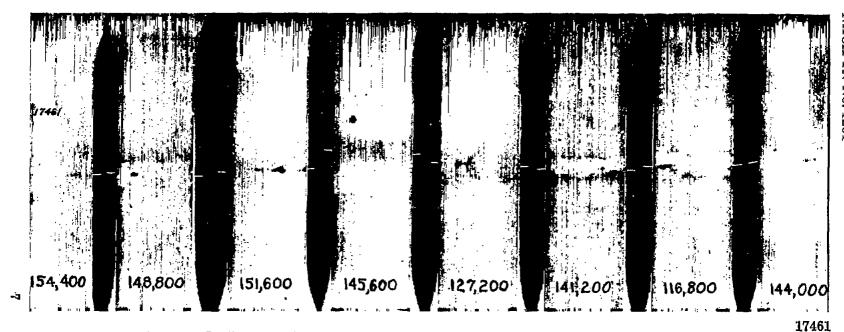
Radiograph of metal-arc-welded static tension specimens in 1/8-inch SAE 4130 sheet.
